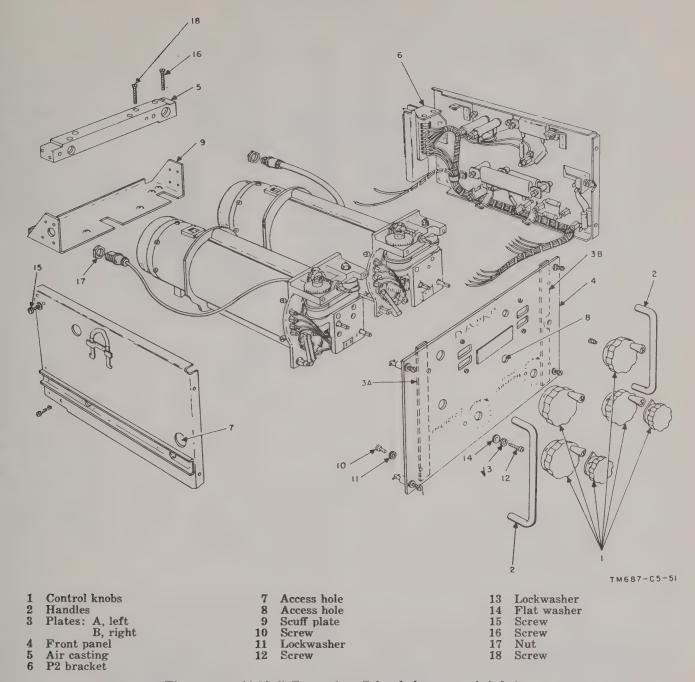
(Added) Transmitter D-band rf tuner, exploded view.
